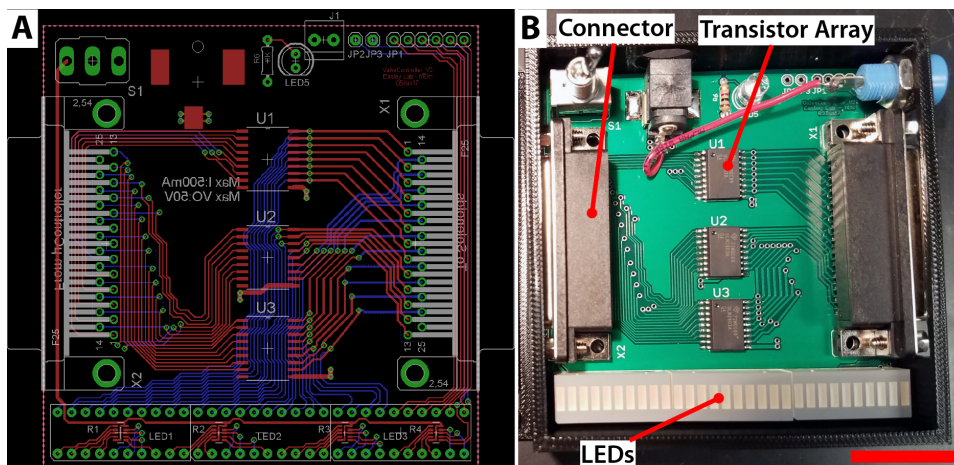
Completed solenoid valve buffer device. (A) PCB artwork of controller board. (B) Assembled device including PCB, connectors, LEDs and 3D printed box. Scale Bar 25 mm.
